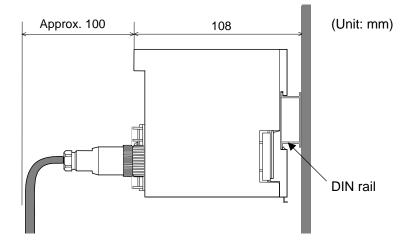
Example of module mounting depth (For micro-style connector)
